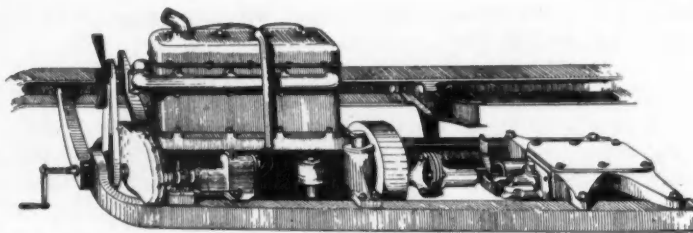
SUB-FRAME MOUNTING OF THE TYPE-J BUS
